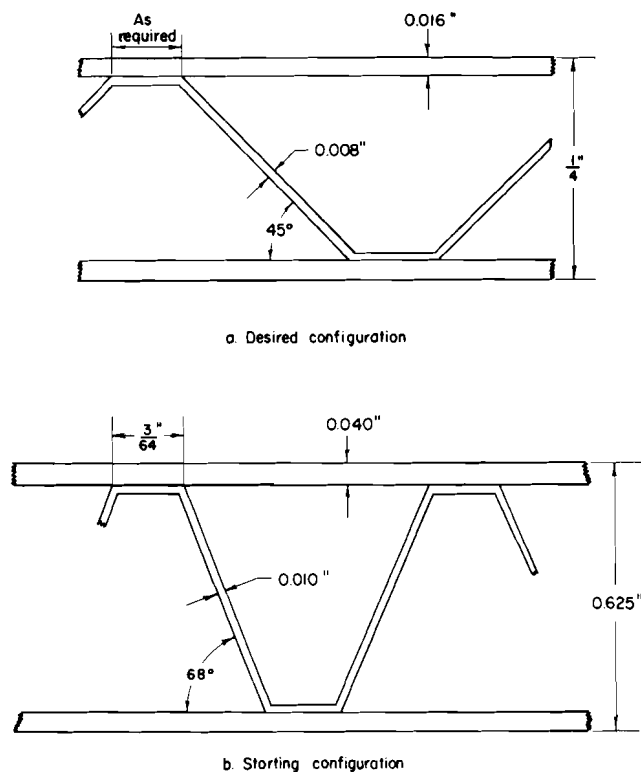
CROSS SECTIONS OF A TRUSS CORE SANDWICH PANEL BEFORE AND AFTER ROLLING⁽¹⁸⁾
